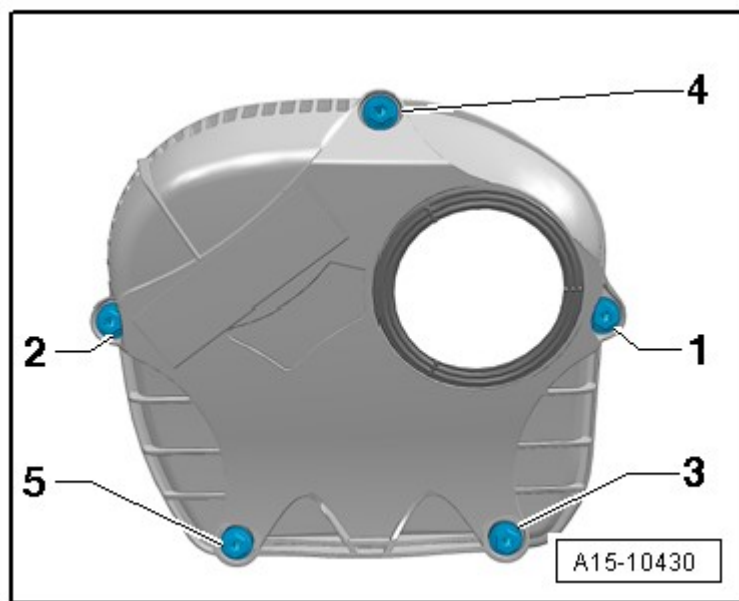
Identifying Upper Timing Chain Cover - Tightening Sequence
